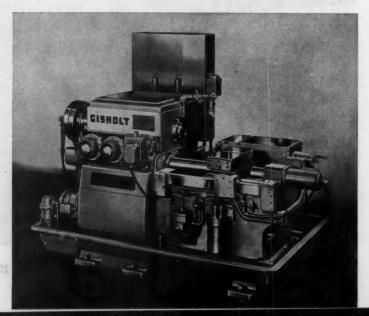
(Right) Masterline No. 12 automatic production lathe providing single-spindle chucking
